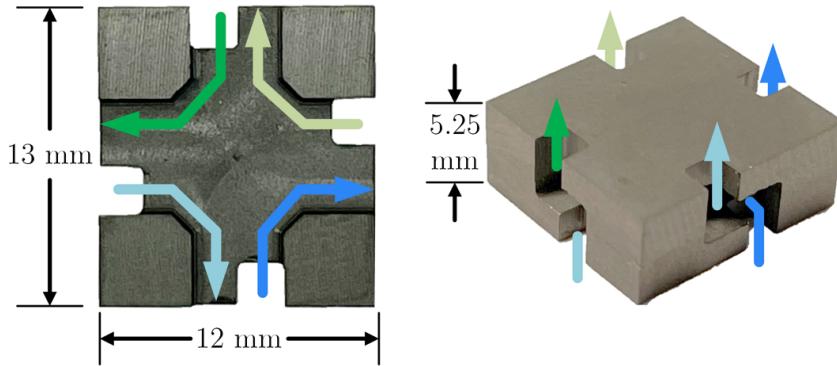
Picture of the fabricated inductor design. The windings fit within the footprint of the core and enable vertical power delivery.
